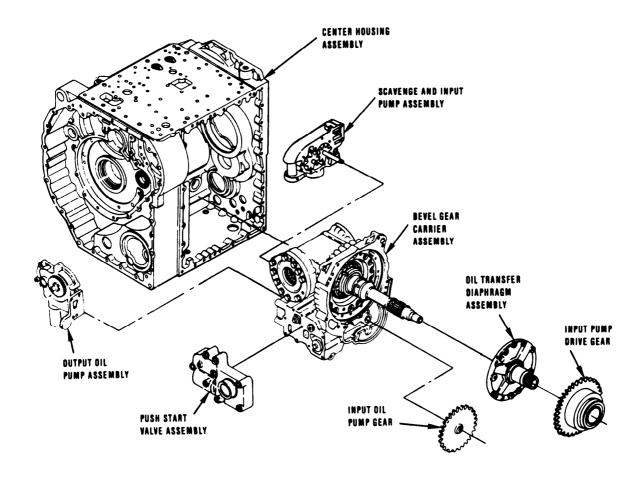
Exploded View of Bevel Gear Assembly Components
